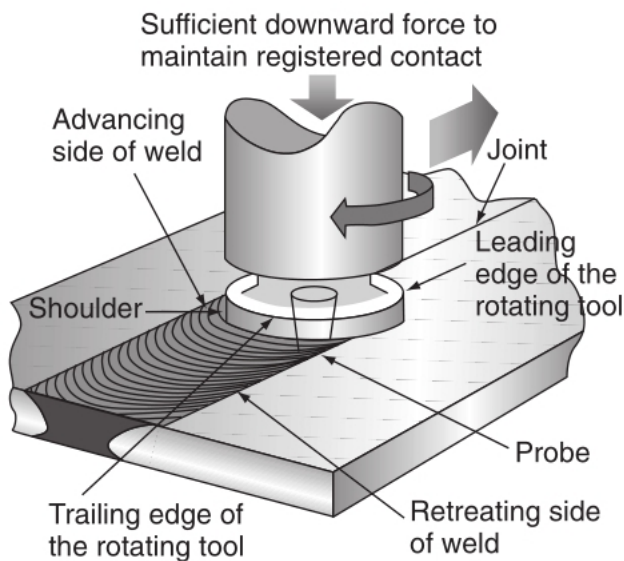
Figure illustrating the principles of the friction stir welding process [16].
